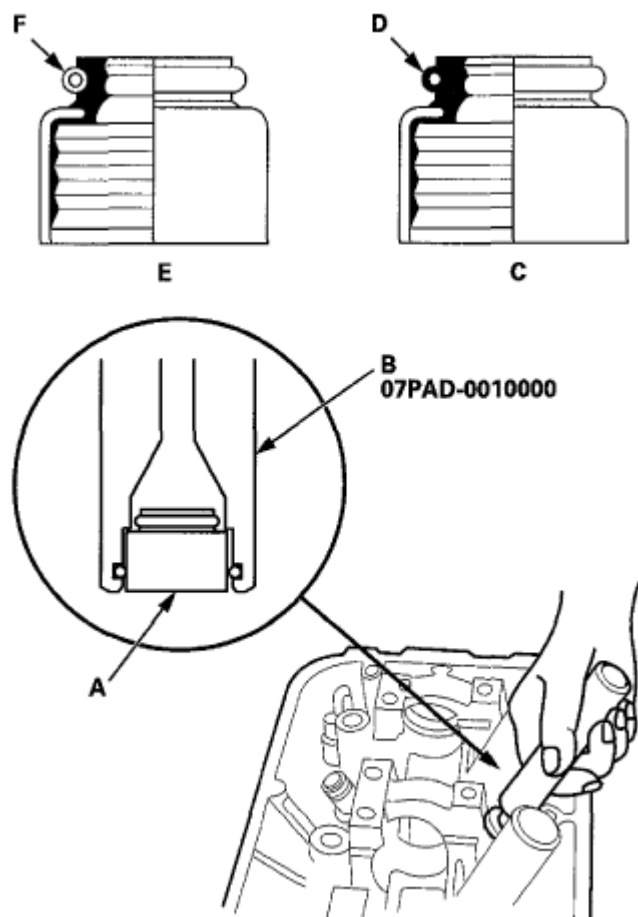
Installing Valve Seals Using Stem Seal Driver
